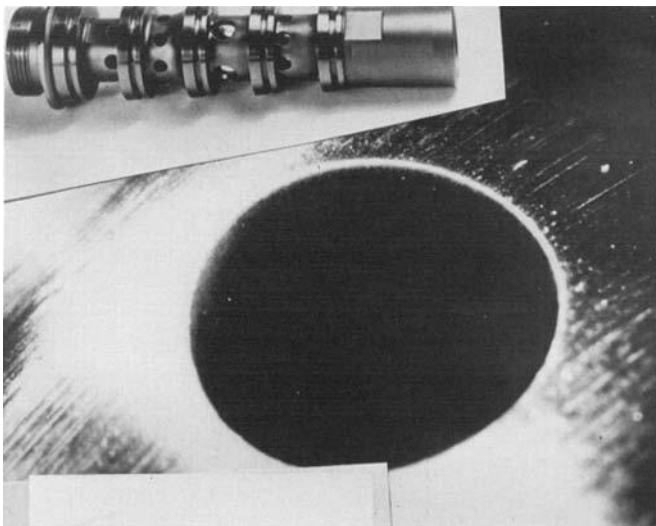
Enlargement of cross hole in hydraulic sleeve shown above following extrude hone processing.
